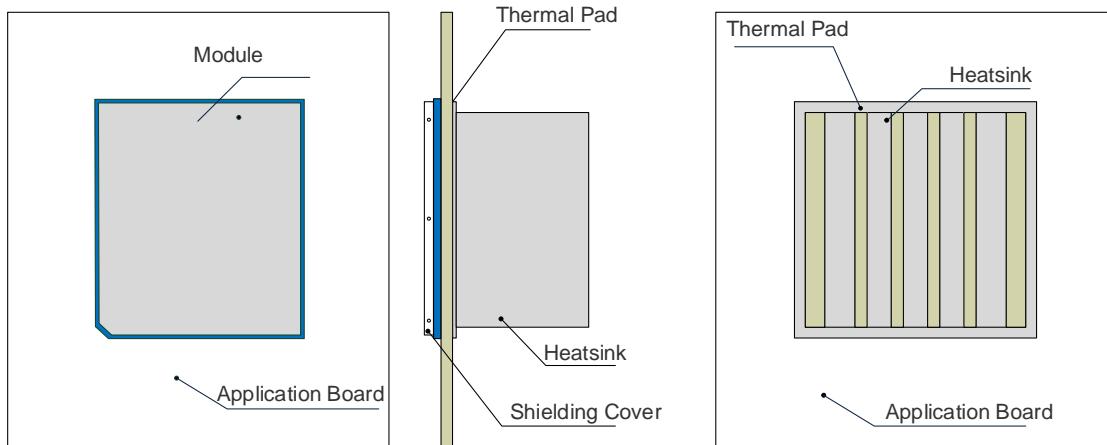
Referenced Heatsink Design (Heatsink at the Backside of Customers' PCB)
